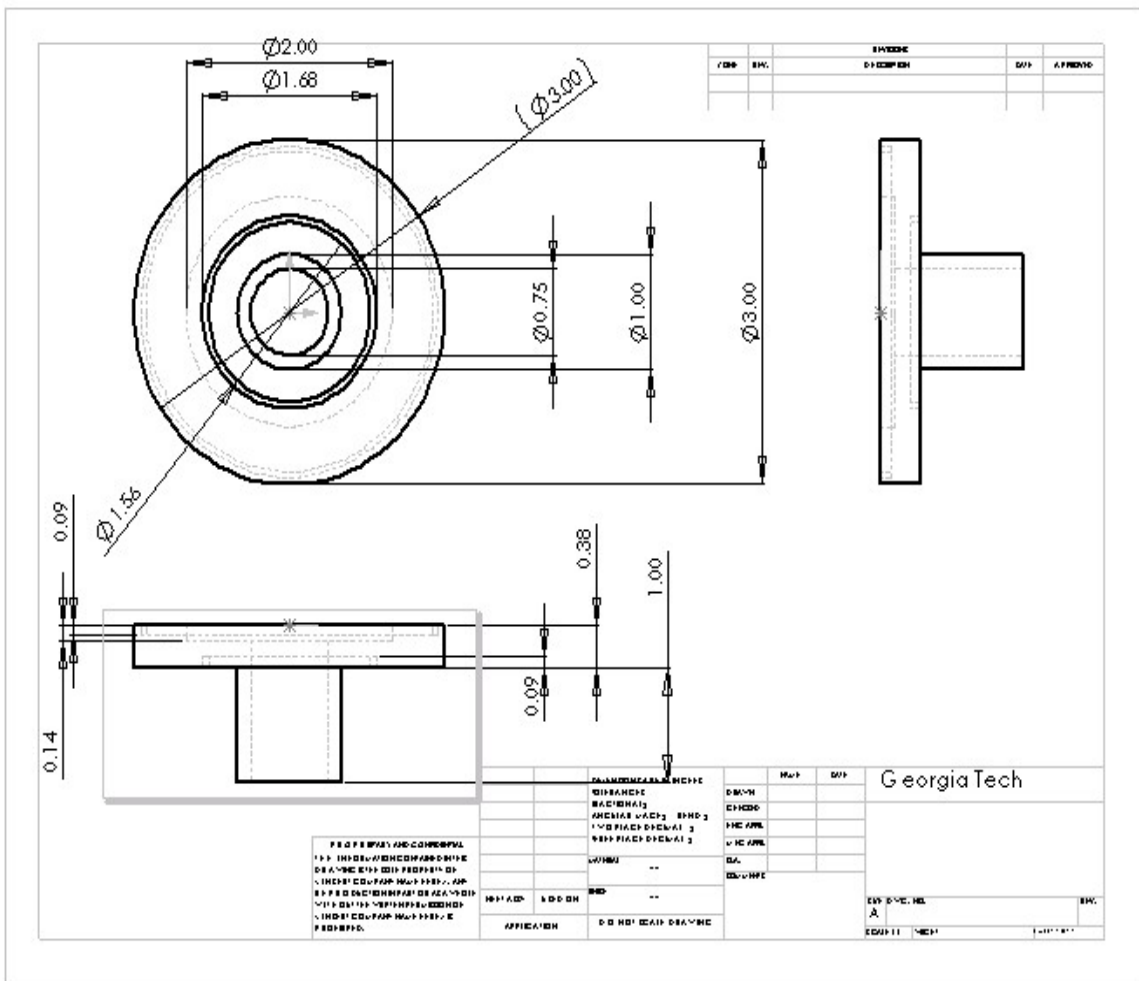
Drawing shows inlet component of the aortic valve holder. All the dimensions are given in inches.
